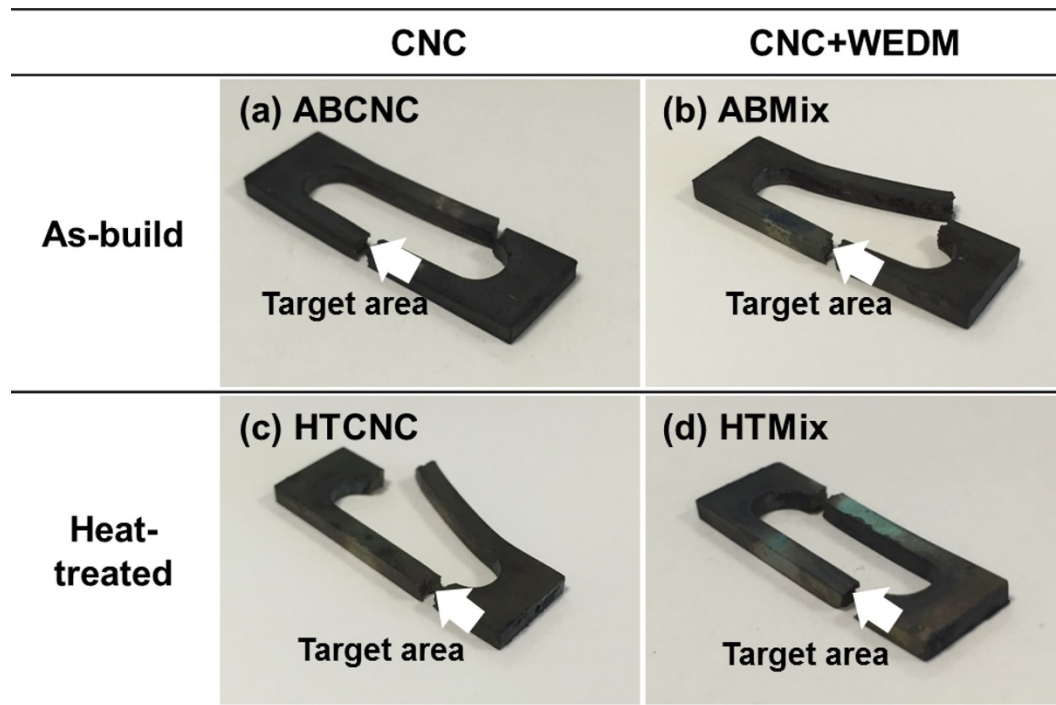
Failure modes in specimens selected for fracture surface analysis
